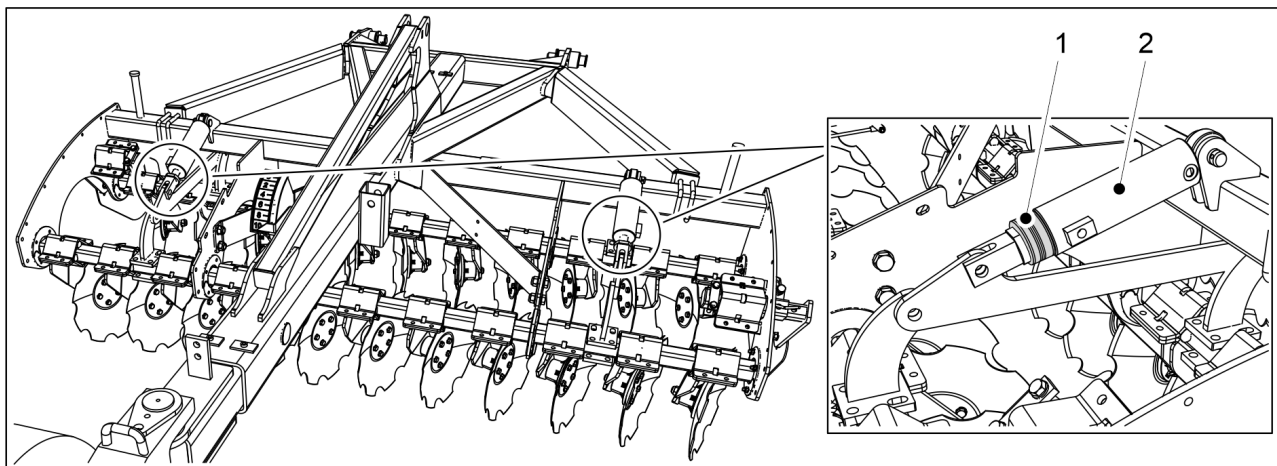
193. Adjusting the front disc cultivator tillage depth
